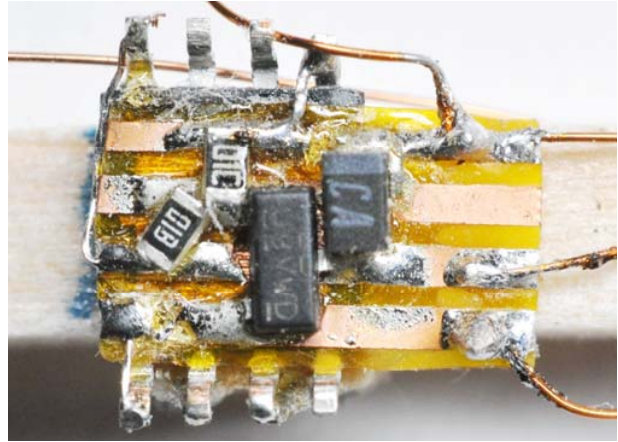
Experimental setup of a circuit board with FET motor driver. Microcontroller Attiny 85V is located on the back side (original dimensions ca. 6x8 mm)
